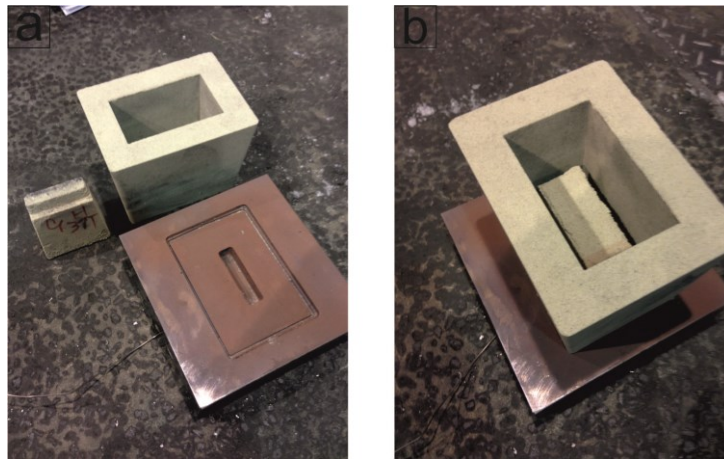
(a) internal core, outer core and steel plate (b) casting box before pouring Al-melt.
